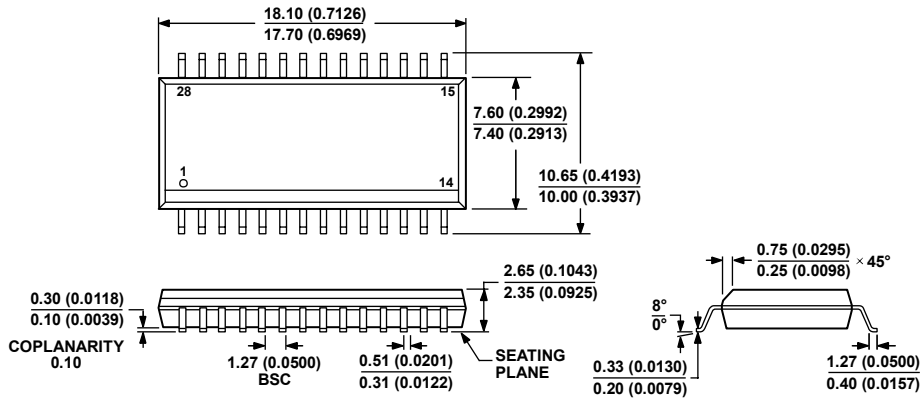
28-Lead Standard Small Outline Package [SOIC\_W] Wide Body (RW-28)
